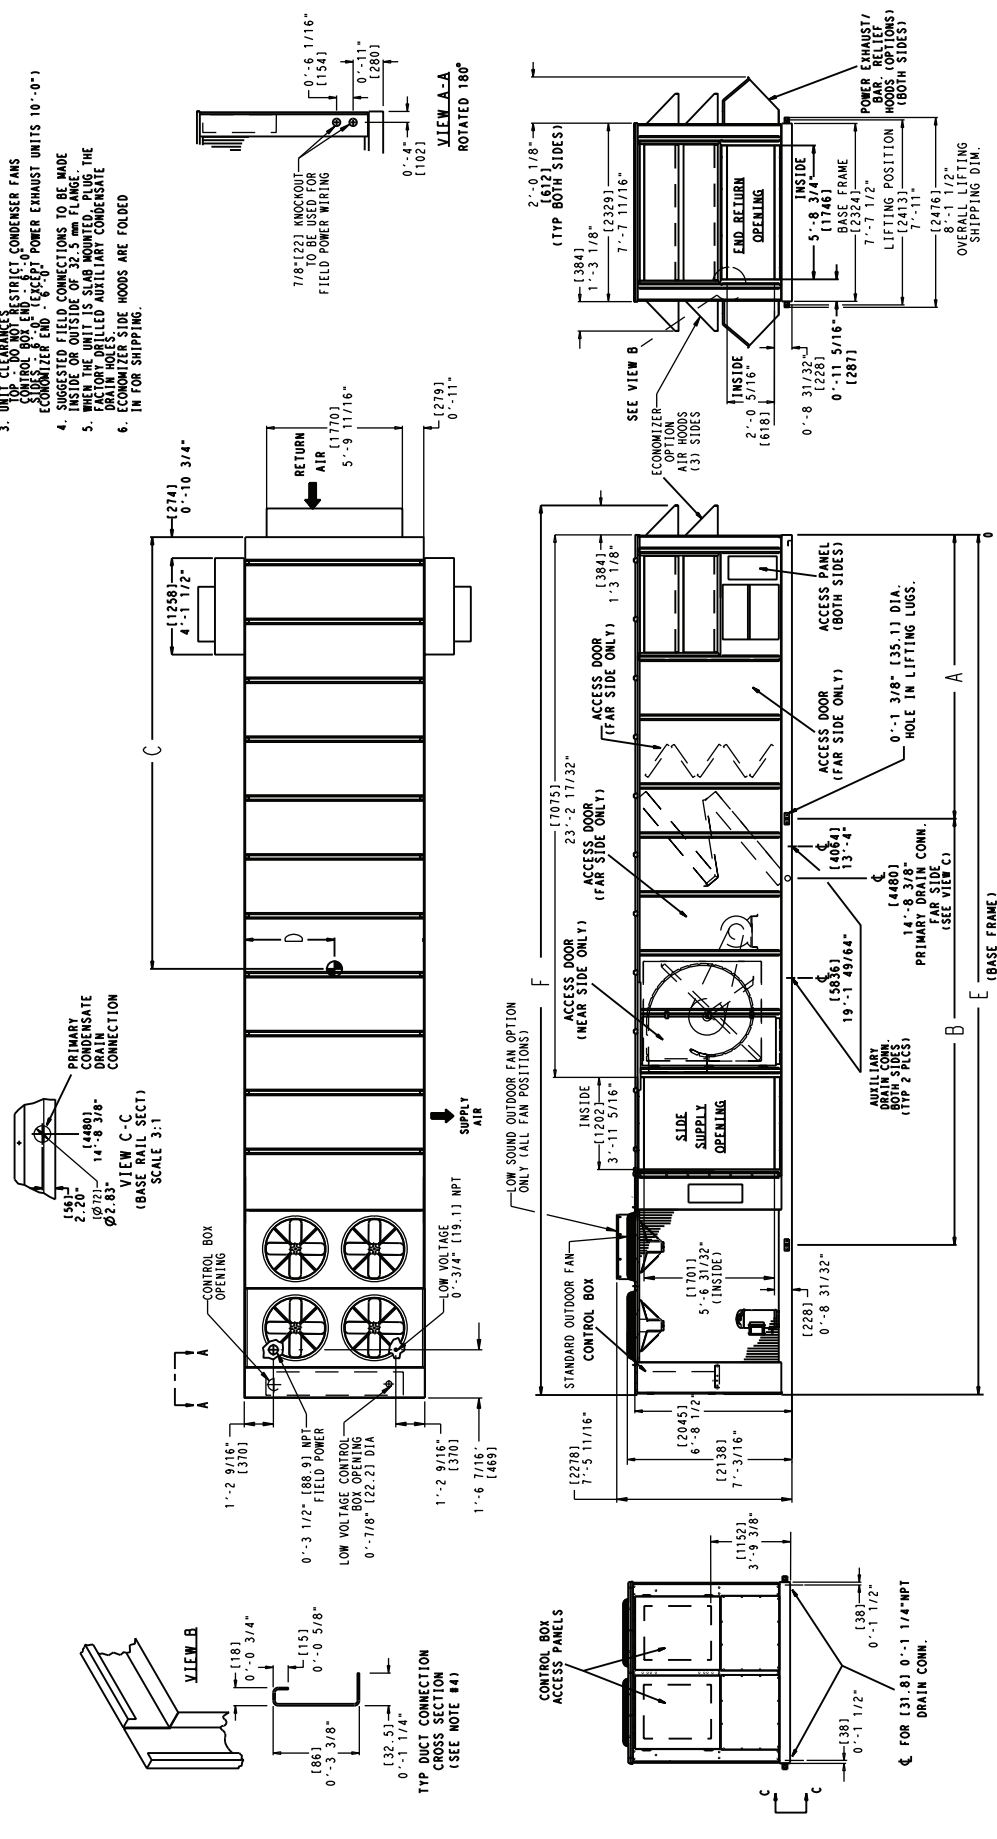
Base Unit Dimensional Drawing — 50P4,P5055,060 (Standard Chassis Unit Shown)
